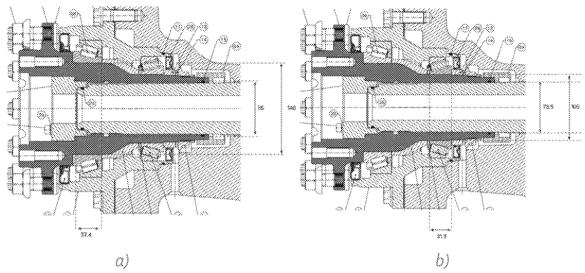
Bearings position on the hub: a) large bearing; b) small bearing
